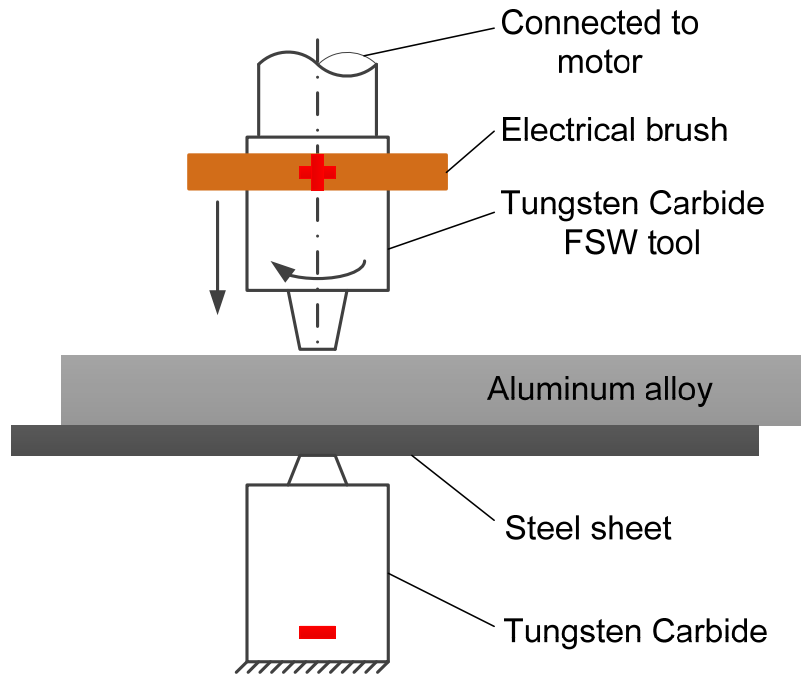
Schematic illustration of the hybrid friction stir resistance spot welding process
